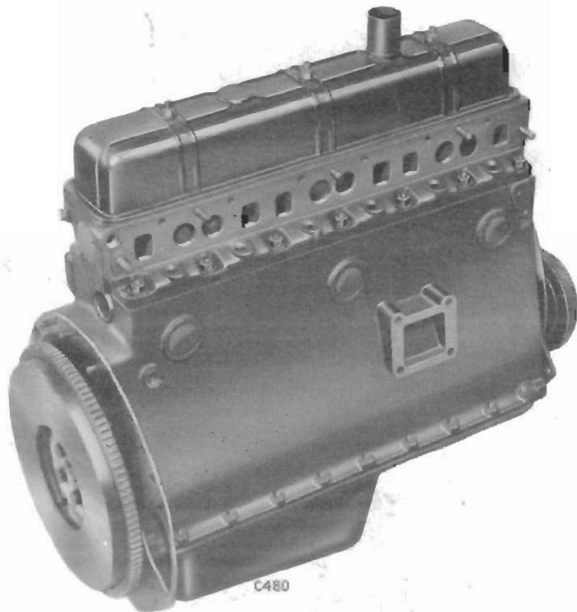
Right-hand rear view of Vitesse reconditioned unit
